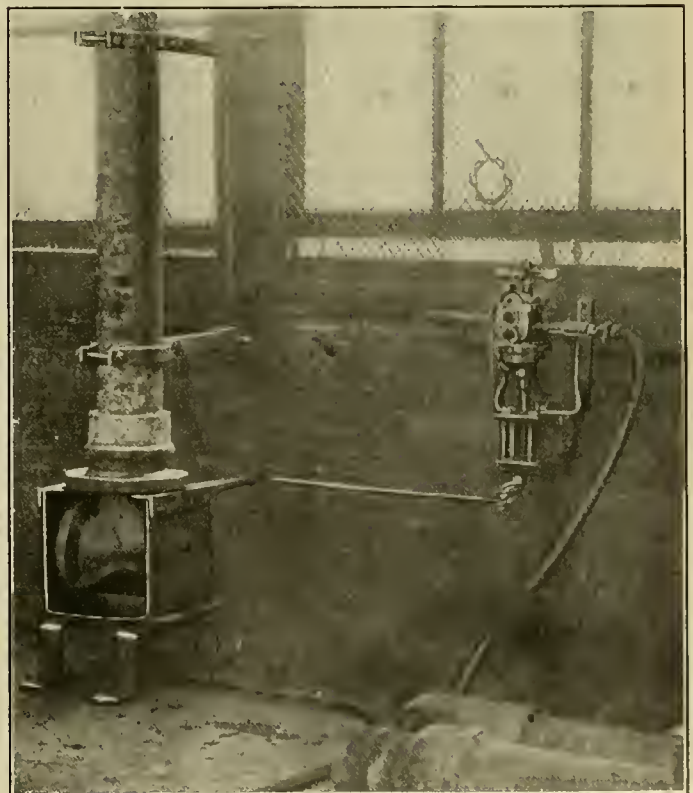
DETAIL OF JIG FOR FACING MAIN VALVE SEAT—WESTINGHOUSE AIR PUMP.
